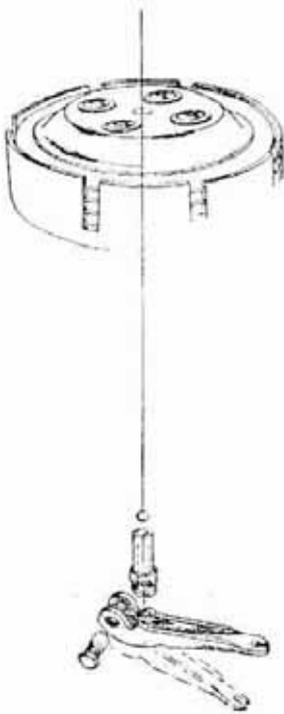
CLUTCH AND CLUTCH-OPERATING MECHANISM USED ON C.P.-TYPE GEARBOX.
